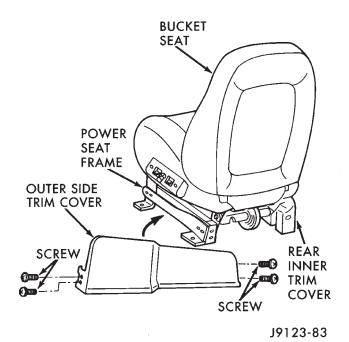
Power Bucket Seat Outer Side Trim Cover
